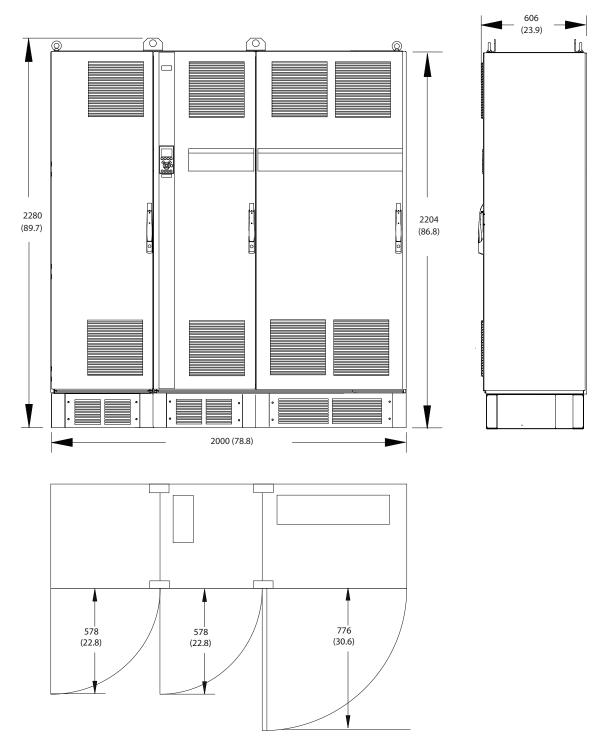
Front, Side, and Door Clearance Dimensions for F3
